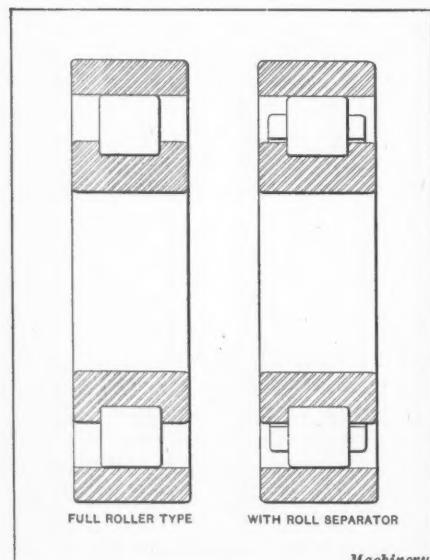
Two Types of Radial Roller Bearings which are adapted for carrying Heavy Loads where Space is Limited
